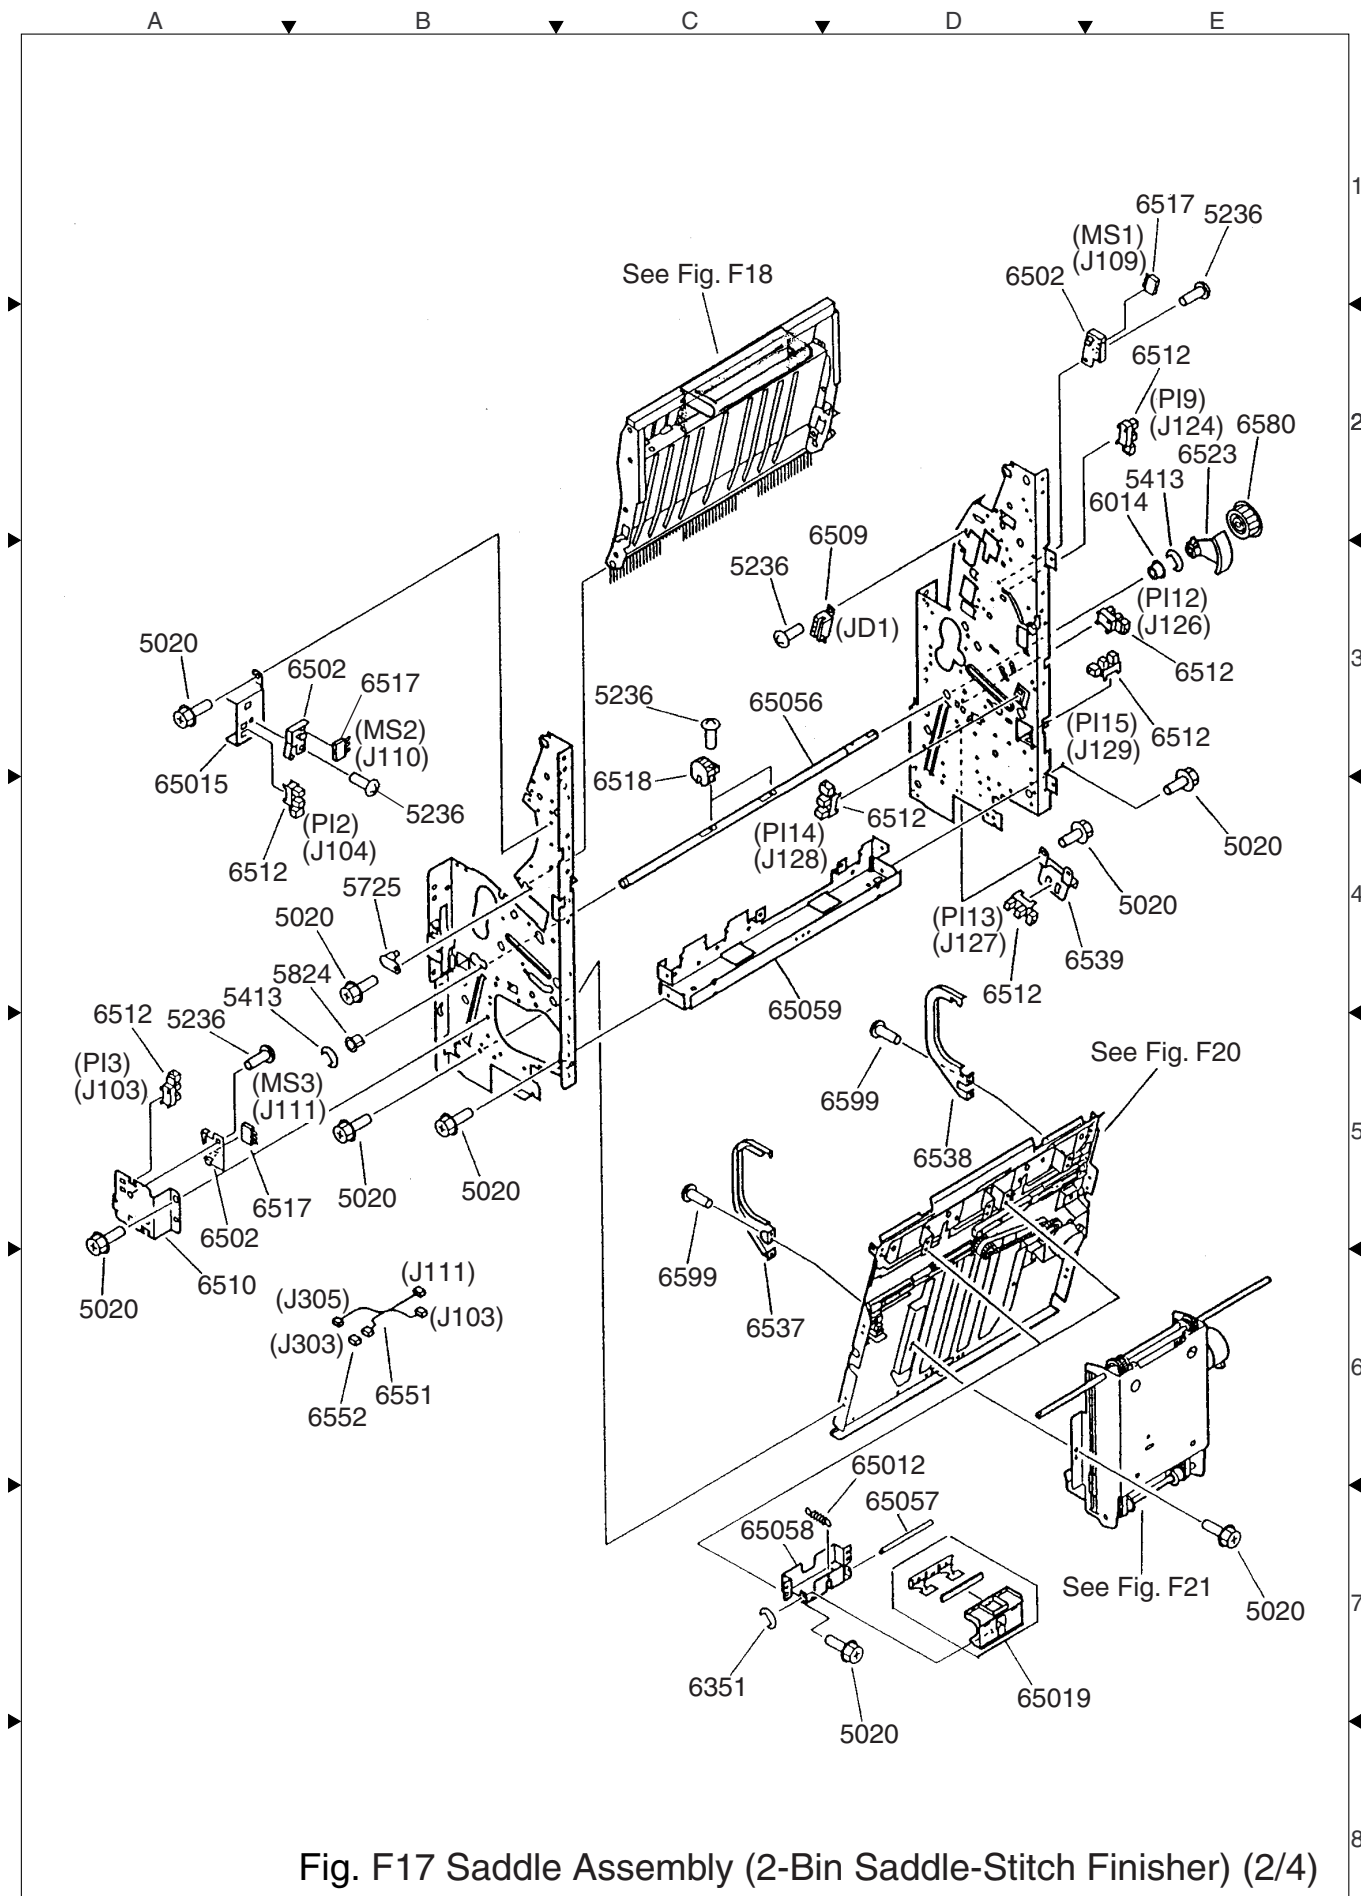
Saddle Assembly (2-Bin Saddle-Stitch Finisher) (2/4)
